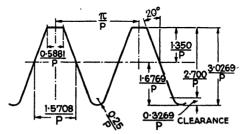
A Basic Rack for Fine Pitch Gears (Earle Buckingham)
